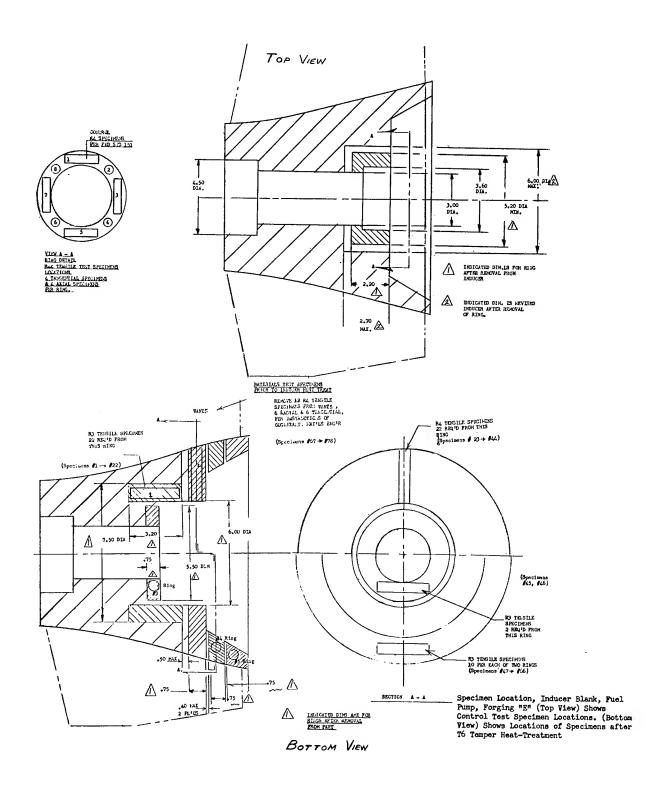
Specimen Location, Inducer Blank, Fuel Pump, Forging "E"
